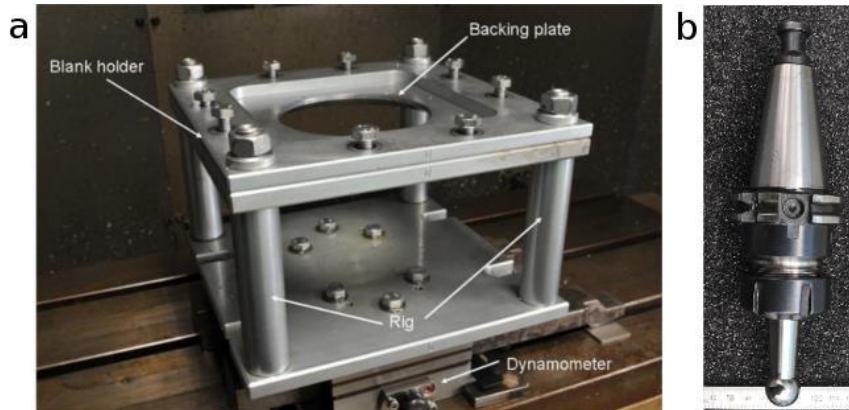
(a) experimental setup for SPIF; (b) forming tool.
